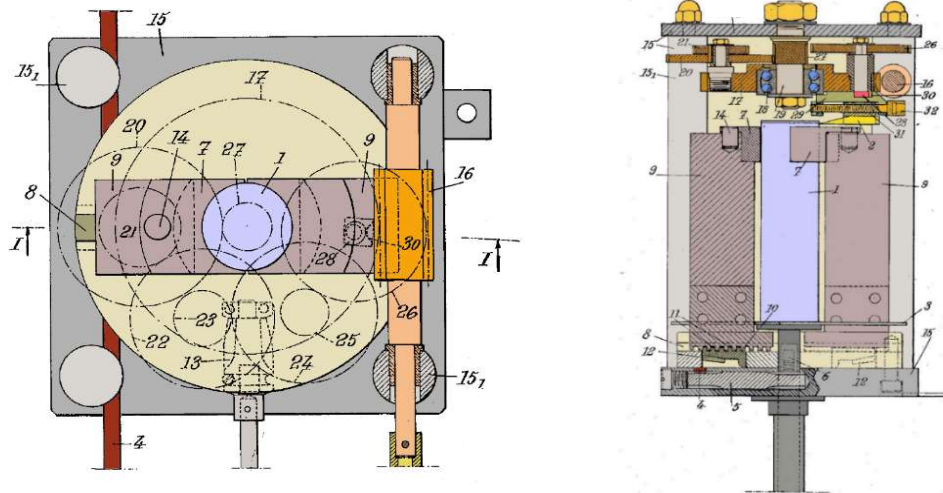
Capsule opening device proposed by Douis et al., top drawing, side-cut drawing.
